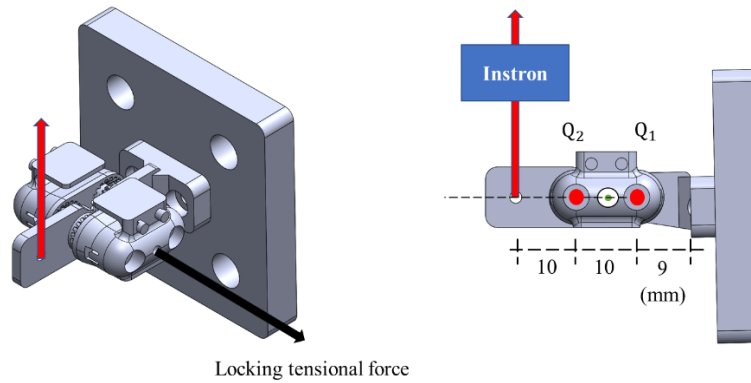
Locking mechanism force test setup. One locking module is set up horizontally on the test platform; the red line indicates the Instron force, and the black line indicates locking tensional force by Bowden cable.
